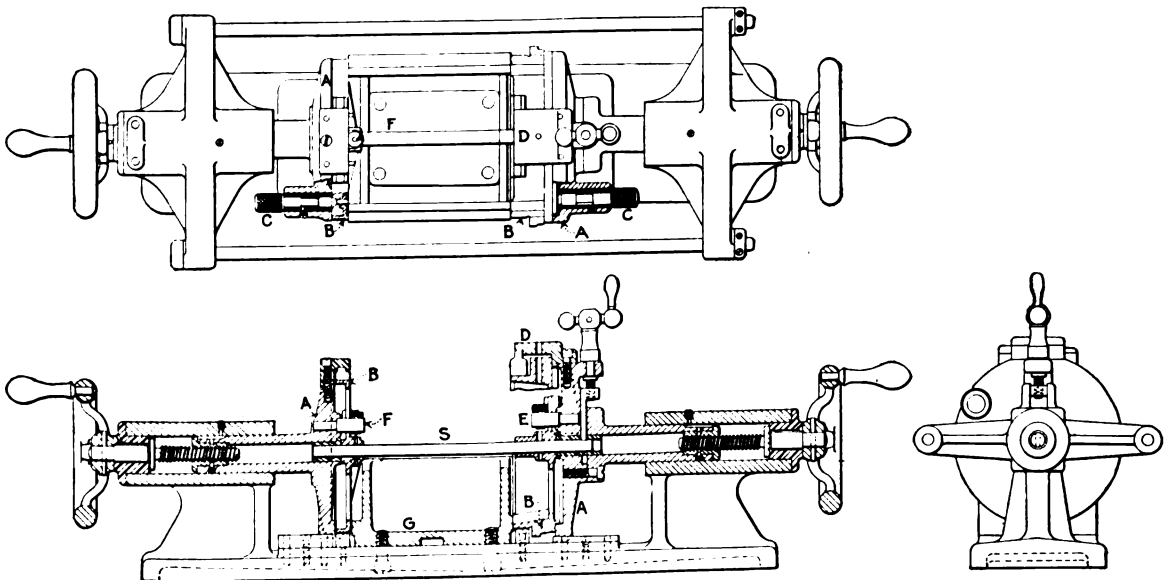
JIG FOR DRILLING AND REAMING HOLES FOR TAPER PINS IN SEGMENTAL PRINTING DRUM
